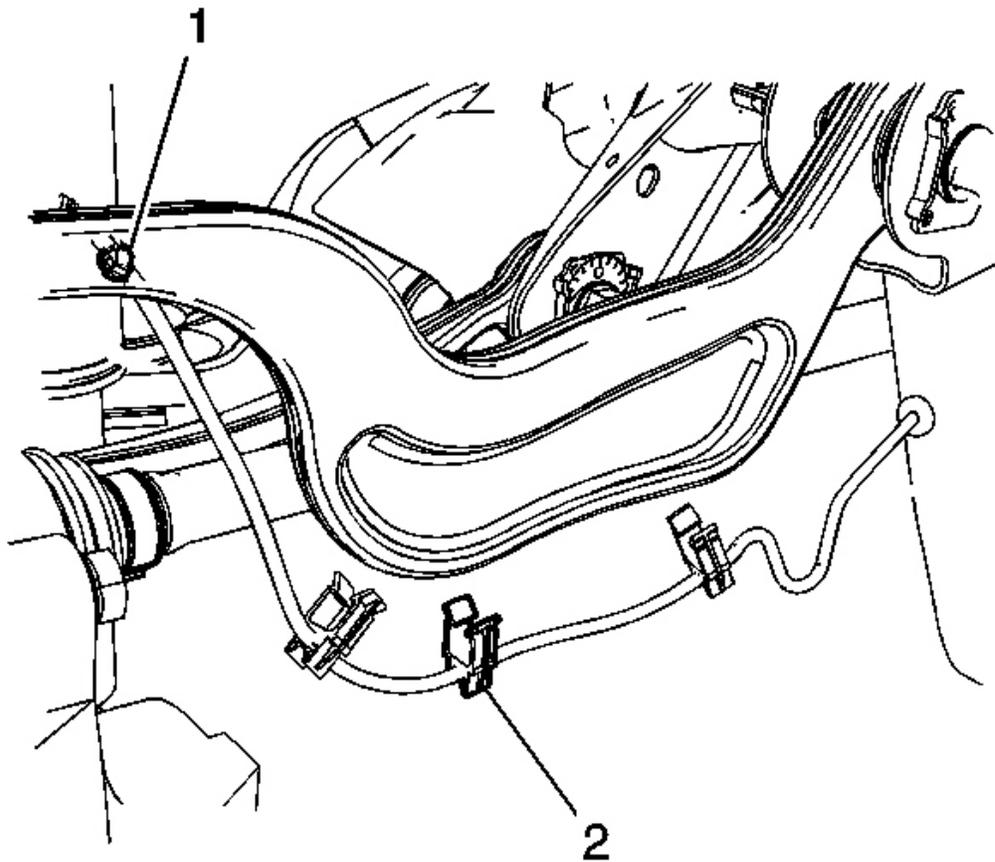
Identifying Upper Control Arm Bolt & Nut
